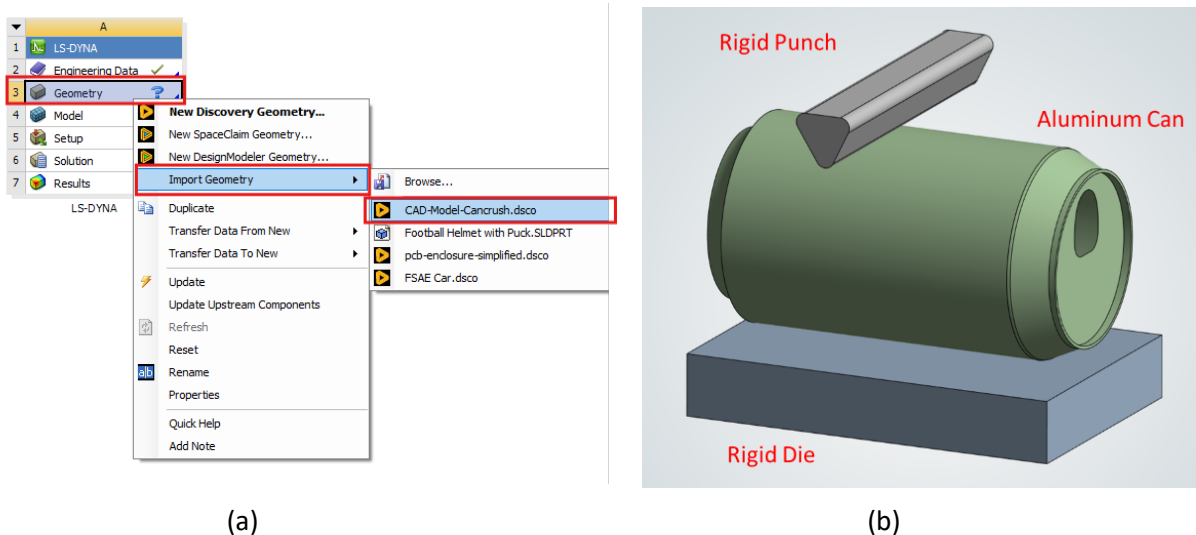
Geometry of the can-crushing problem. (a) Importing geometry in Ansys Workbench module; (b) assembled CAD model consisting of a rigid punch, aluminum can, and rigid die.
